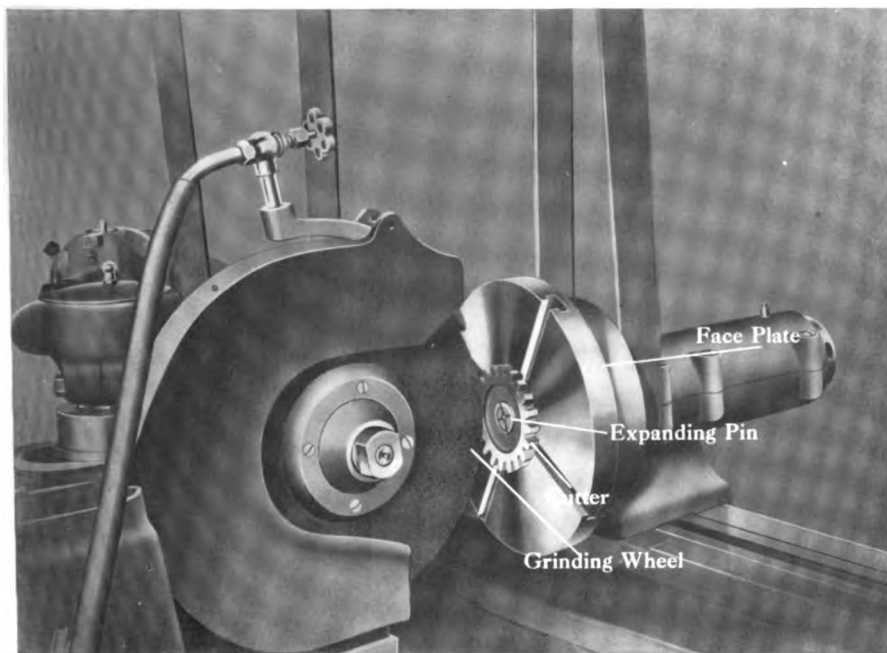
Sharpening Spur Cutter on Universal Grinding Machine
